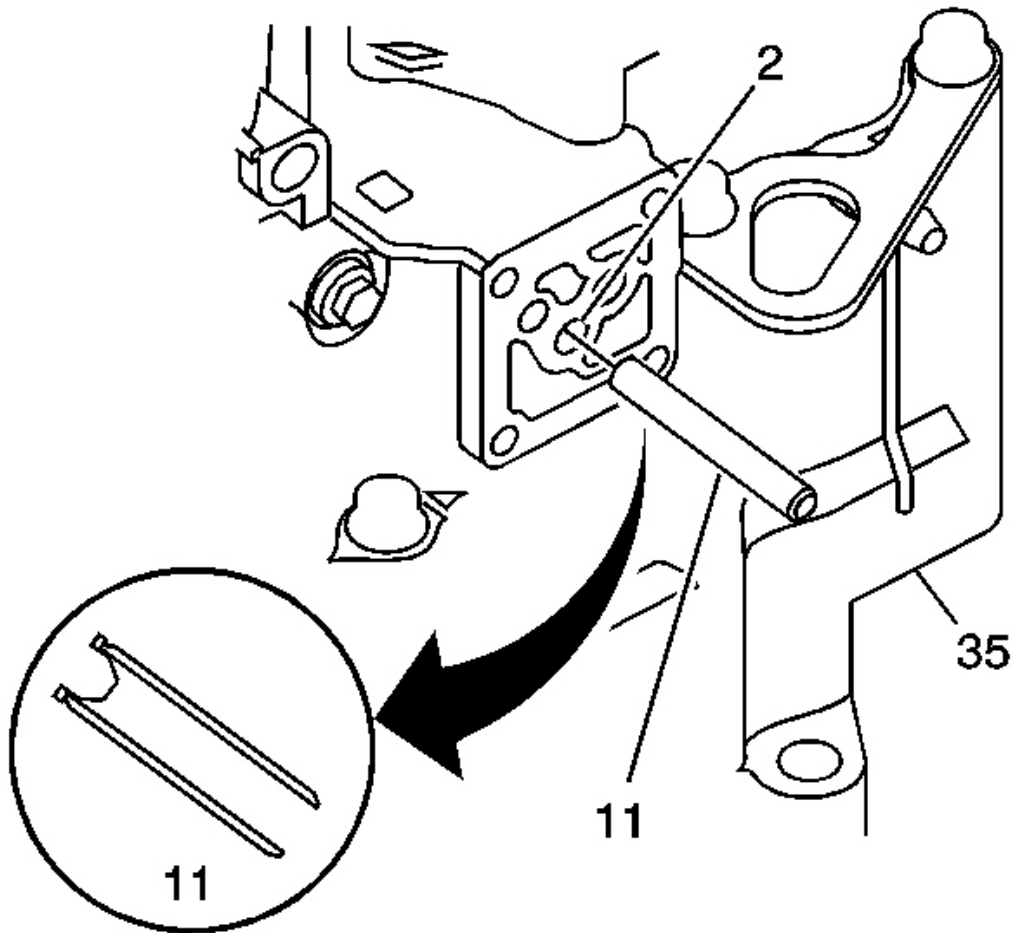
Pressure Control Solenoid Fluid Feed Passage Tube & Transmission Case Hole
